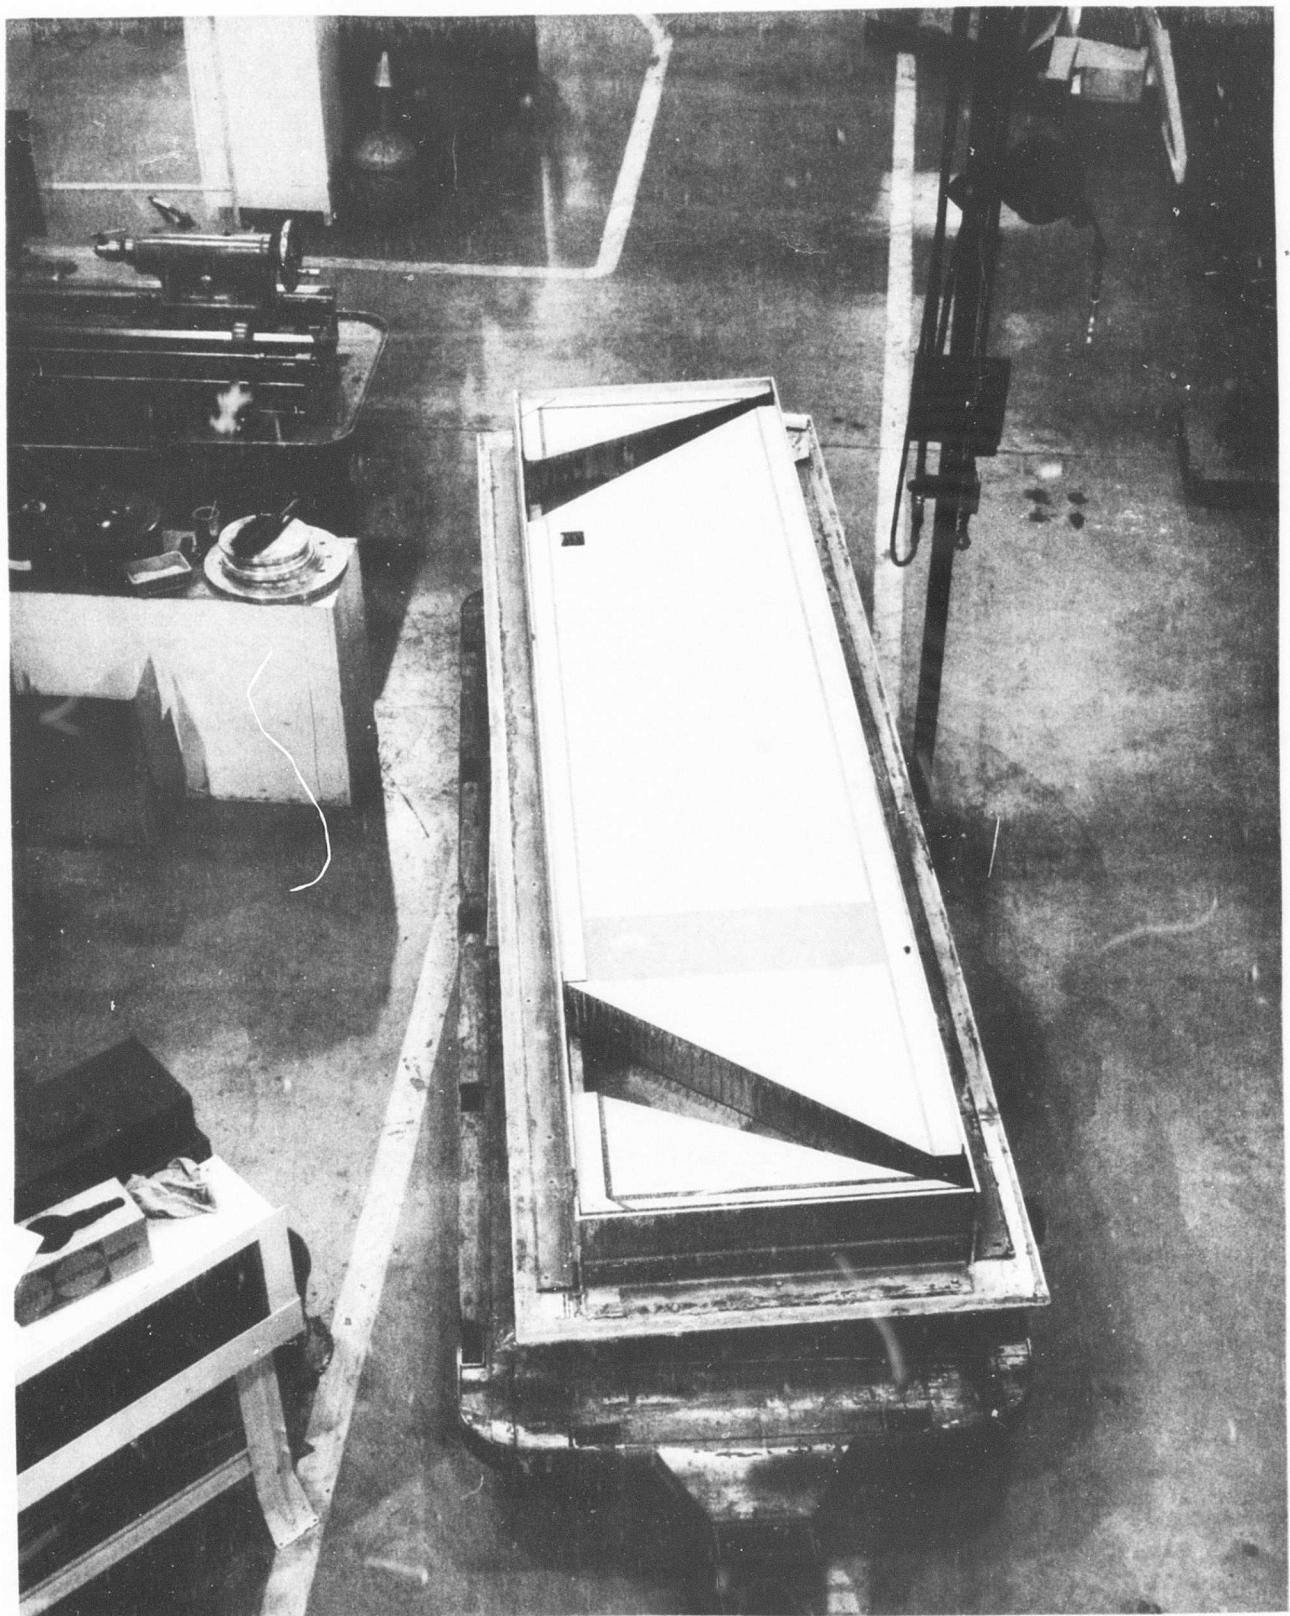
BNTO Bonding Tool TD7-1076B and Honeycomb Bar Assembly in Place.
